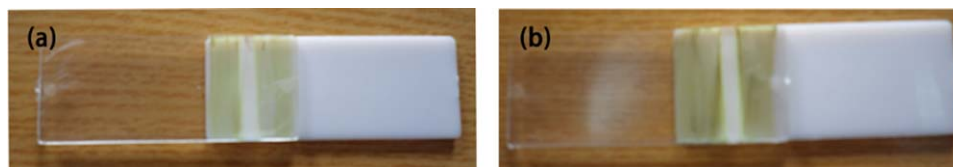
(a) The welding specimen of PMMA/PBT and (b) the welding specimen of PMMA/PC/PBT when the laser power is 19w. [Color figure can be viewed in the online issue, which is available at wileyonlinelibrary.com.]
